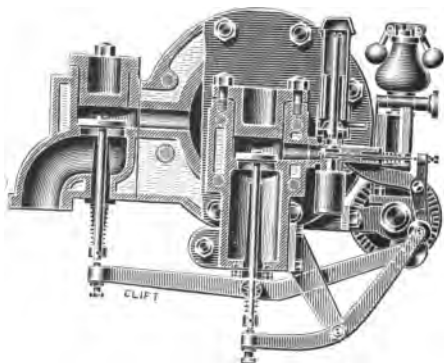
"Stockport" Gas Engine—Sectional End Elevation.
